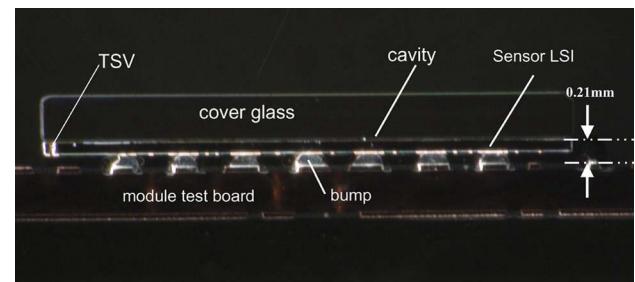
Cross-sectional photo image of new chip size package mounting on the module test board.
